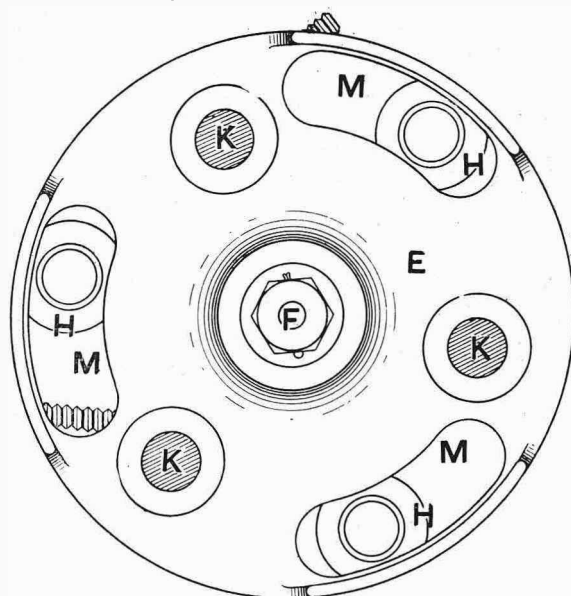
End view of the front flange of the bronze drum. The same letters apply to this drawing as to fig. 1.
